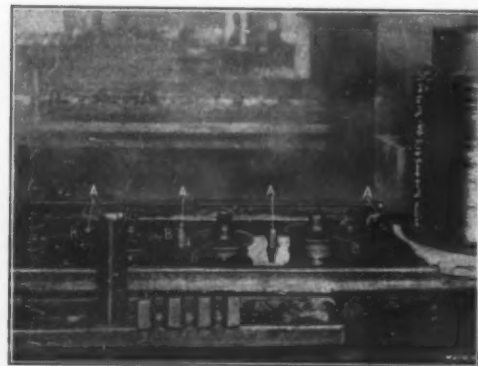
Part of a Continuous Wire Drawing Machine for Finer Sizes of Wire.
